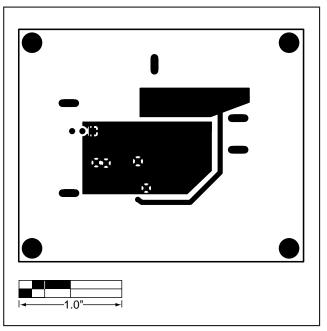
MAX618 EV Kit PC Board Layout—Solder Side
